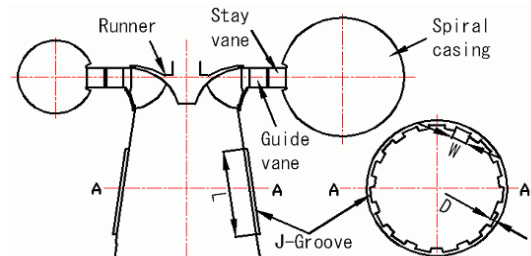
Dimensions of J-Groove installed in a draft tube of Francis turbine
